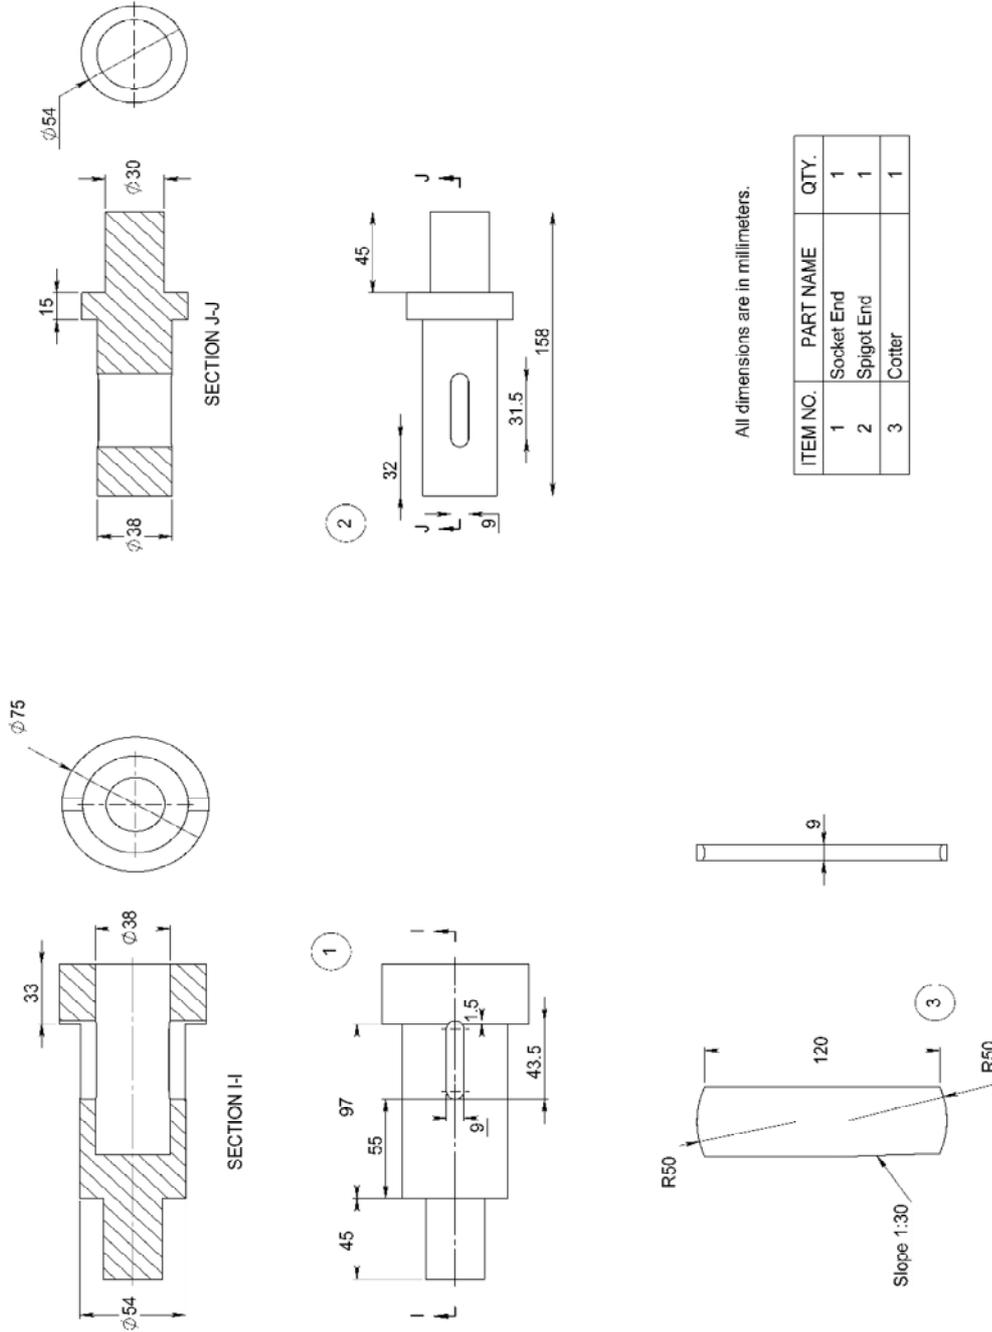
Detailed views of cotter joint with socket and spigot
